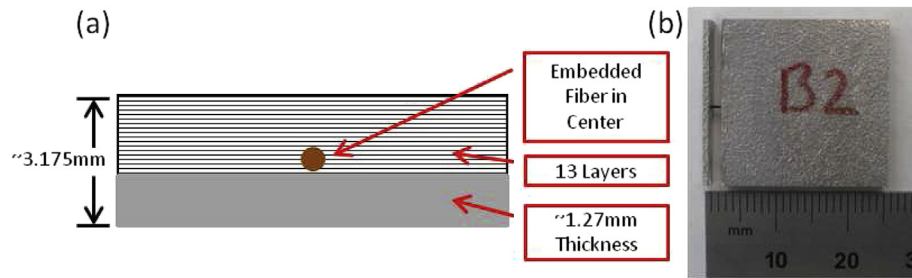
Sample details: (a) schematic of sample cross section with key fabrication details; (b) physical sample ready to test post manufacture.
